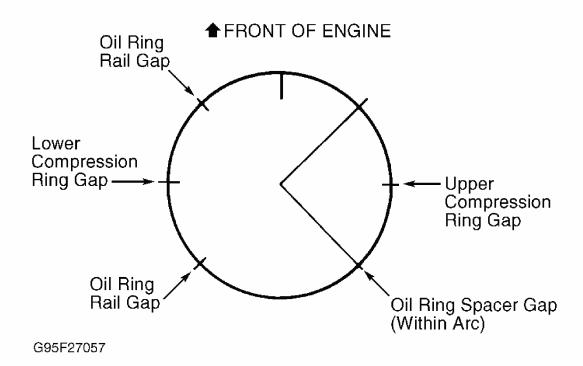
Positioning Piston Ring End Gaps Courtesy of GENERAL MOTORS CORP.
